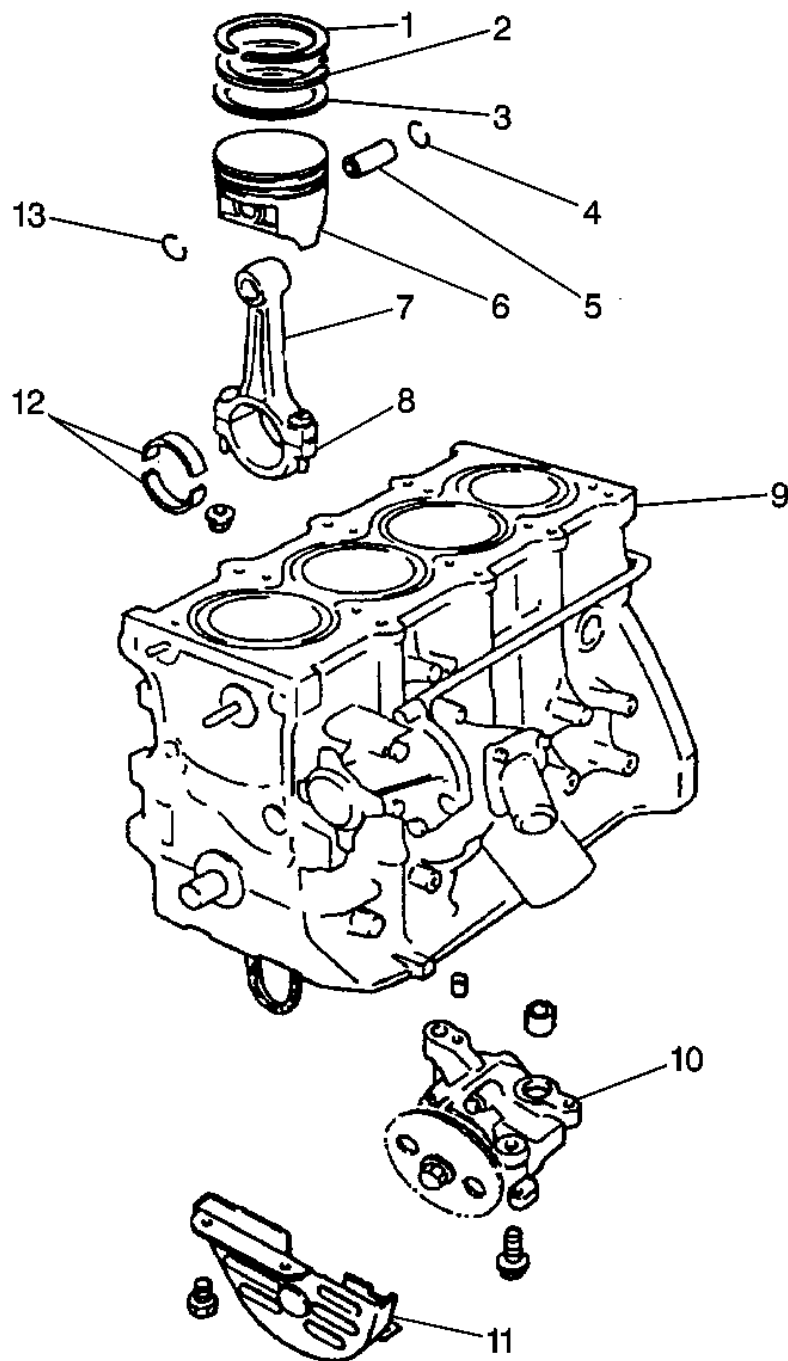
Pistons, Piston Rings, Connecting Rods, and Cylinders
